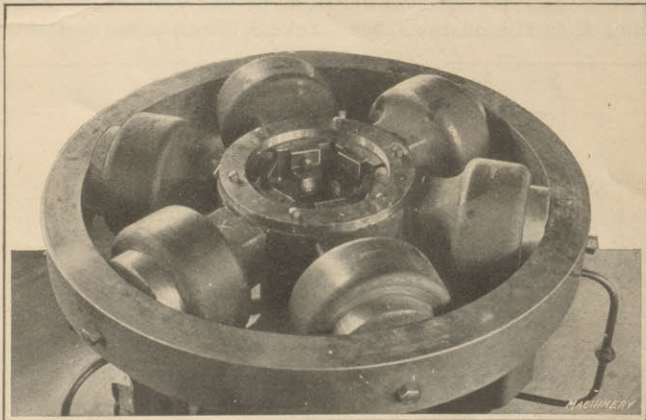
Close View showing Closing in Dies of Banding Machine shown in Fig. 30
